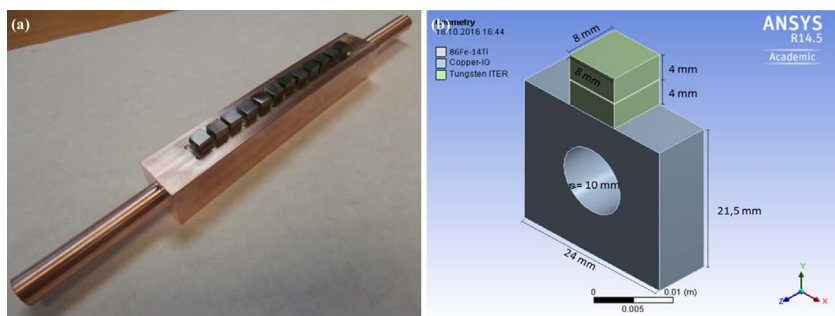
(a) General view of cooling structures with the brazed samples used for the tests. (b) Schematic representation and dimensions of the samples and cooling component used for the tests.
